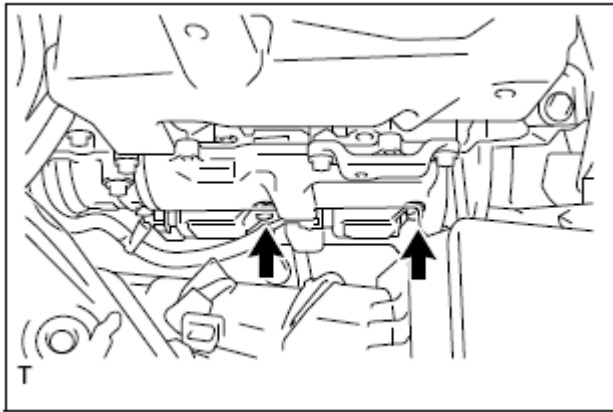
Identifying Ignition Coil Assembly Mounting Bolts (Bank 1 Side)
